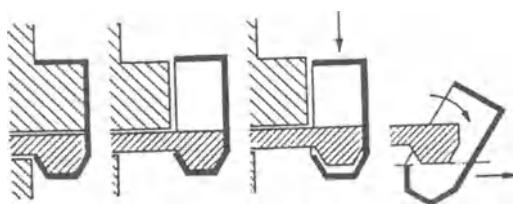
Side action in a mold that is a “slide within a slide.”
